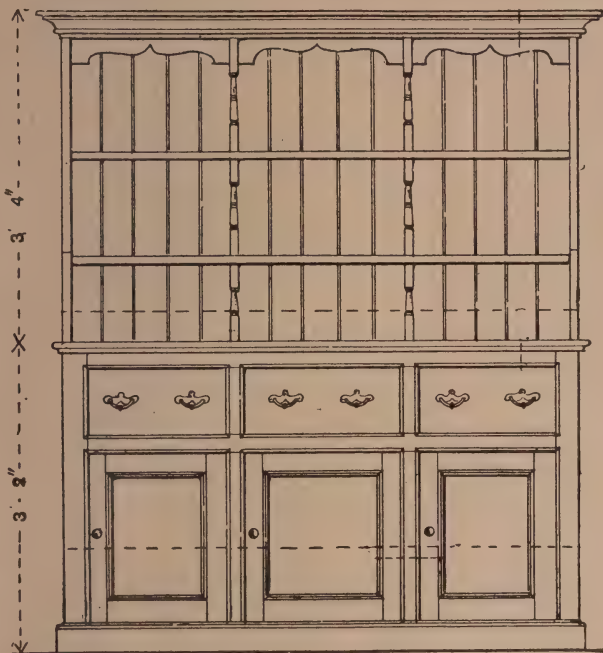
Front Elevation of Dresser with Enclosed Cupboards
